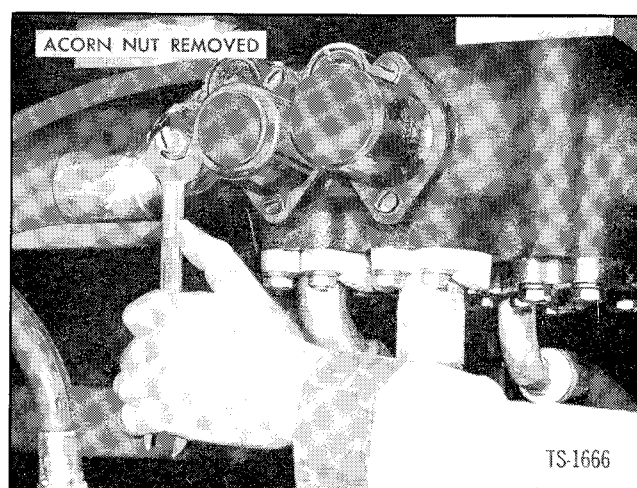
Adjust Pressure — Boom and Bucket (Main Hydraulic) Valve
